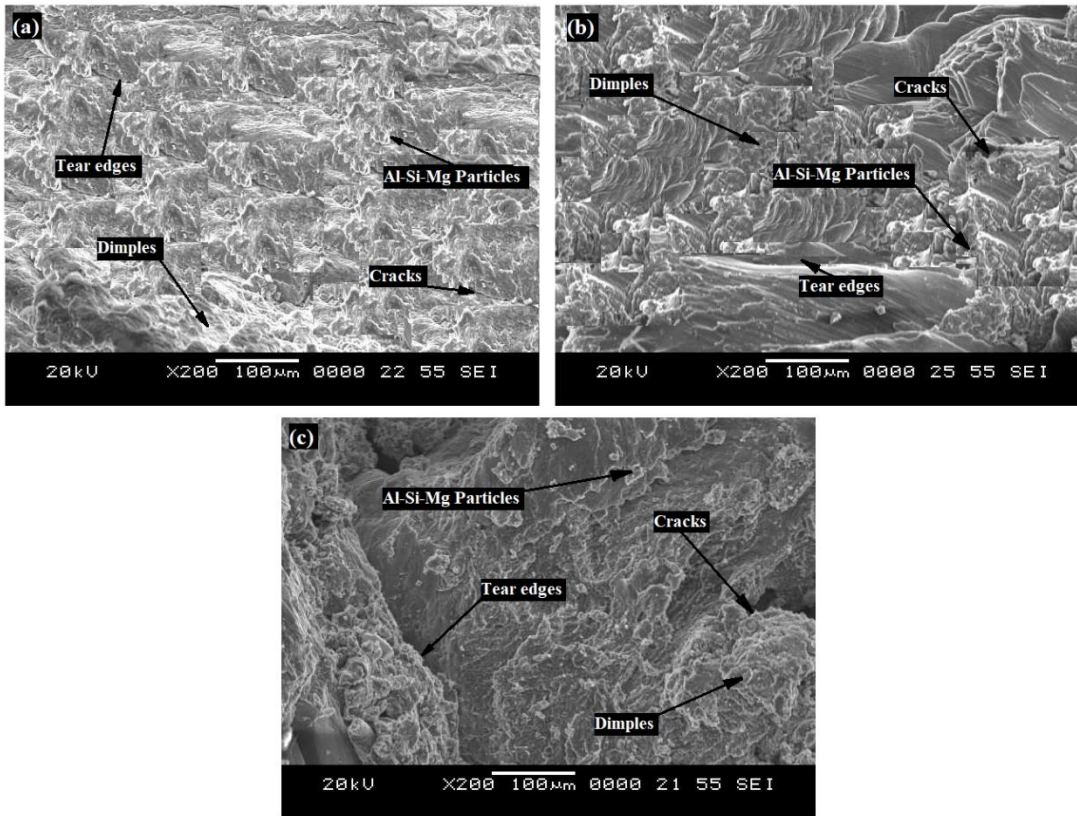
SEM images of tensile fracture surface of Al-5Mg-8Ce-3.5Si aluminium alloy joints friction stir welded at a speed of tool rotation of 1000 RPM and a welding speed of 20 mm/min using; a) Triangular profile pin (TPP) tool, b) Square profile pin (SPP) tool and c) Circular / Round profile pin (CPP) tool.
